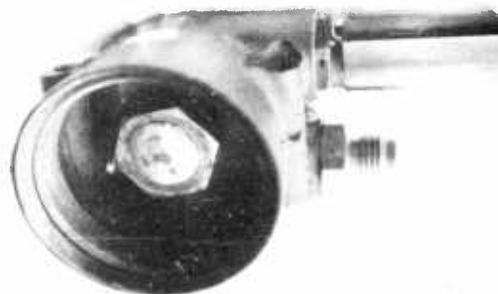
Fuel Filter With Blocking Plug Installed For 100% Fuel Bypass Test
